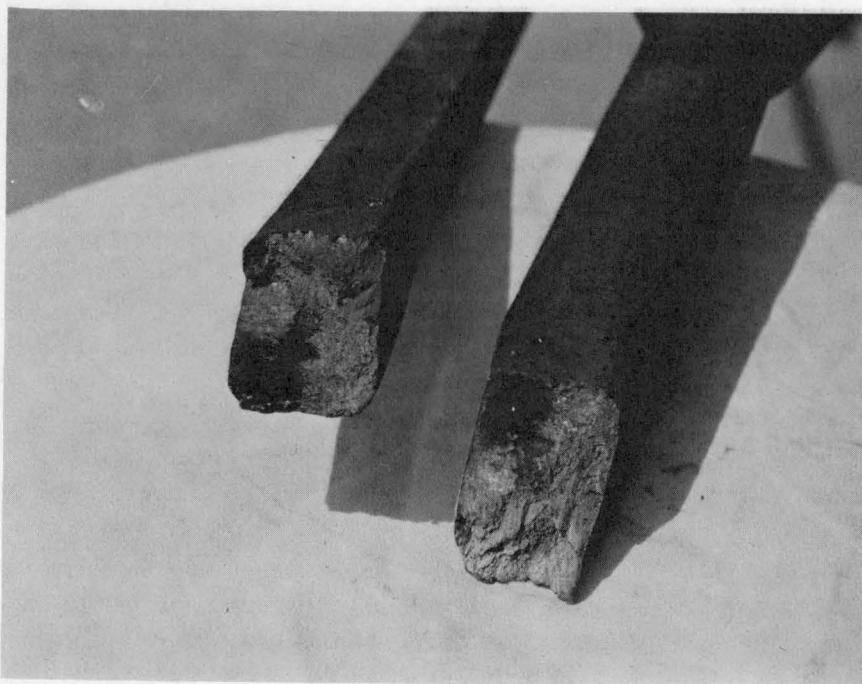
Photograph showing extent of an initial crack in a forging.
